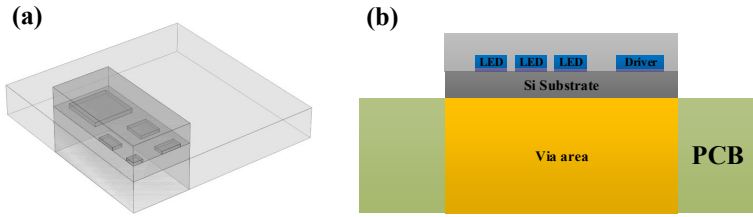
A integrated SSL module with nine LEDs and four ICs: (a)quarterly 3D model; (b) cross-sectional view.
